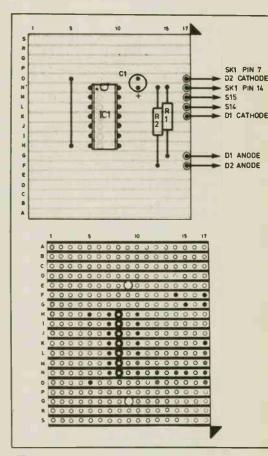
Circuit board component layout and details of breaks to be made in the underside copper tracks.
